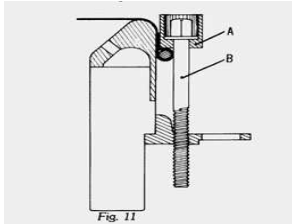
The top-tension banjos featured a specially cast and machined stretcher band (A), into which fit square-head, washer-head bolts (B) to allow adjusting of the skin heads of that time without removing the resonator. The square-head bolts threaded directly into the cast zamac (pot metal) flange, and the armrest could be removed (to get to the bolts beneath it) by loosening a thumbscrew. The flattop tone chamber was officially announced with the introduction of this model. From an acoustical standpoint, the added mass of the cast stretcher band and heavy bracket bolts provided improved sustain. This, combined with the top tension model's solid resonator gave this instrument unusual performance characteristics not found in Gibson's lighter-weight models.
